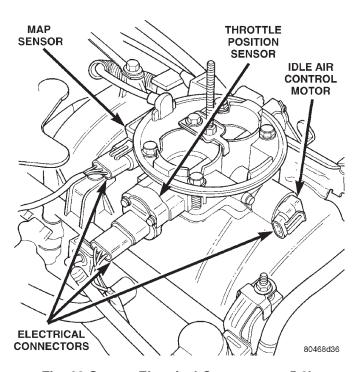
Sensor Electrical Connectors—5.2L Engine—Typical
